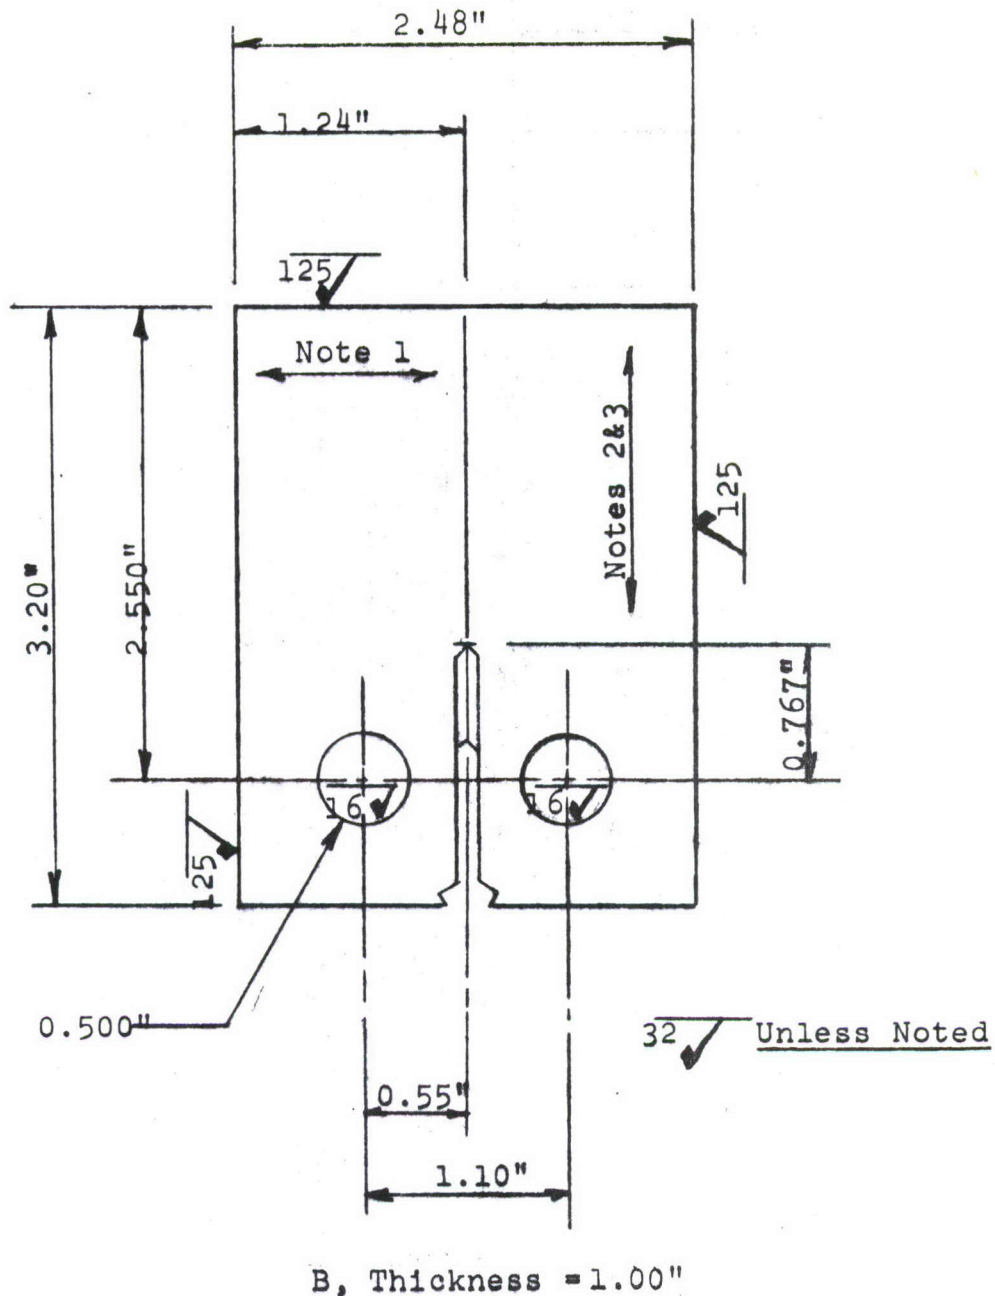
EDM Notched Crack Propagation Specimen
